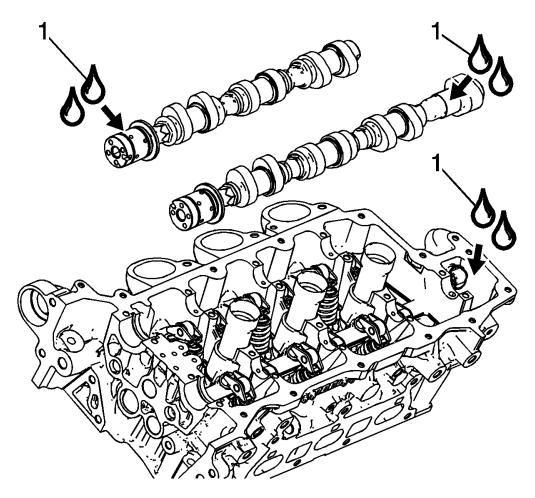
Camshaft Journal Lubrication Points Courtesy of GENERAL MOTORS COMPANY
